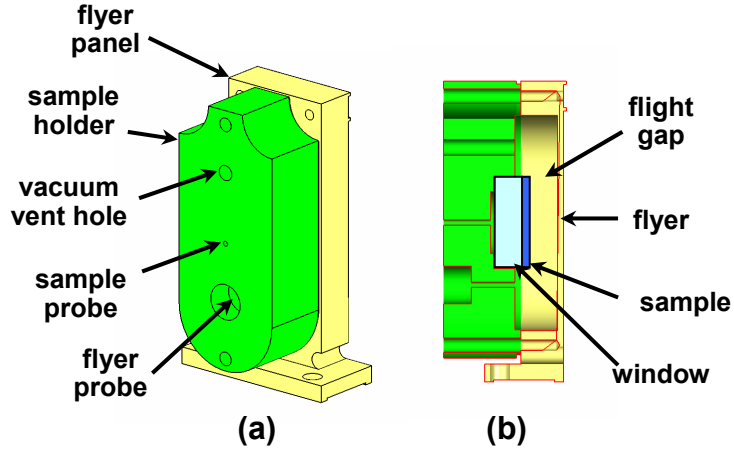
(a) The assembled flyer panel and sample holder, and (b) the cross-section view with a sample/window in place.
